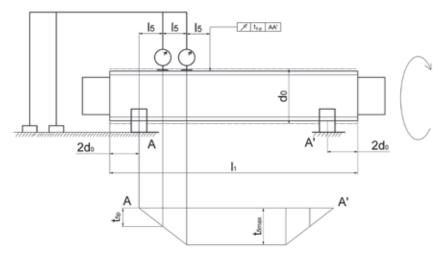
Measurement of the concentricity deviation t₅ of the Ball Screw shaft outer diameter
